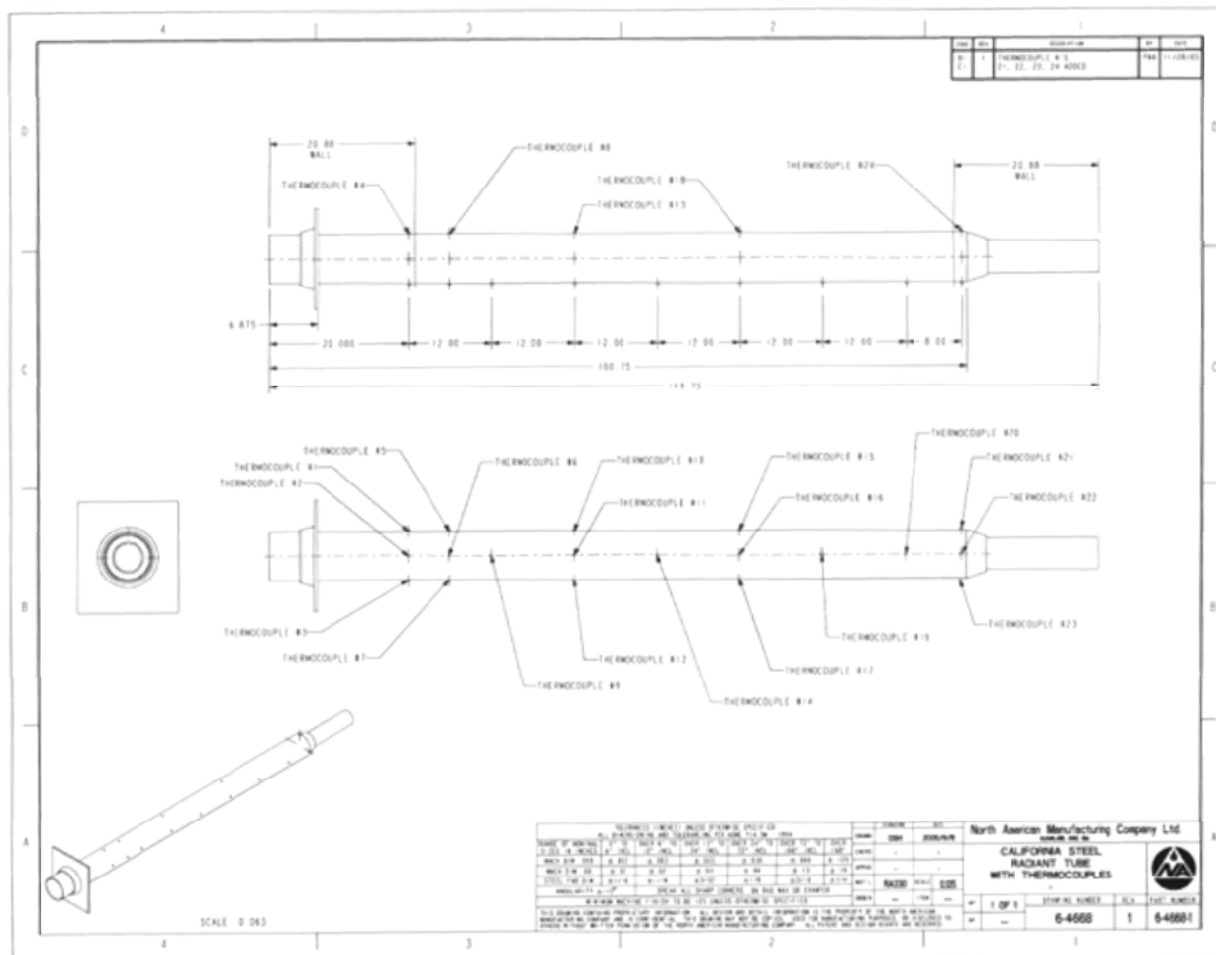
Thermocouple layout on the radiant tube of burner No. 69 South
